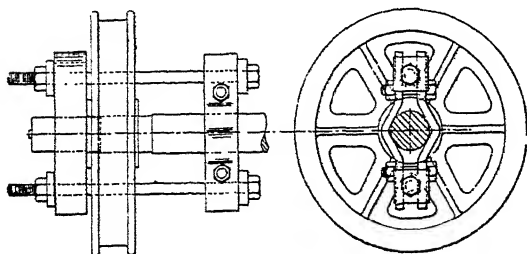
METHOD OF REMOVING BUSH WITH NUT AND BOLT
